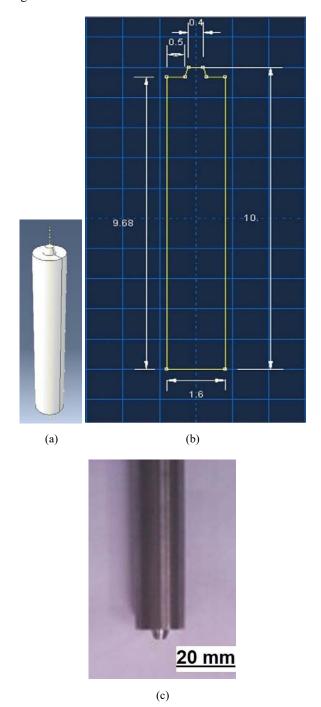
The tool used for FSW (a), and (b) (all dimensions are in cm), are schematic of tool and (c) is picture of tool
